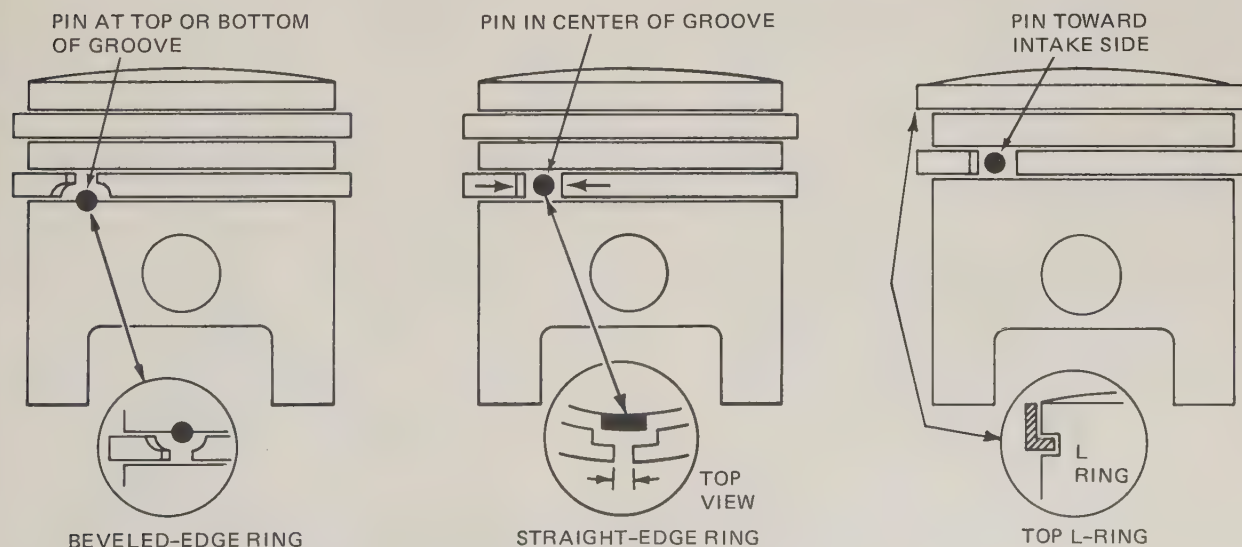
Various pin-type piston rings used in small engines. (Kohler Company)
